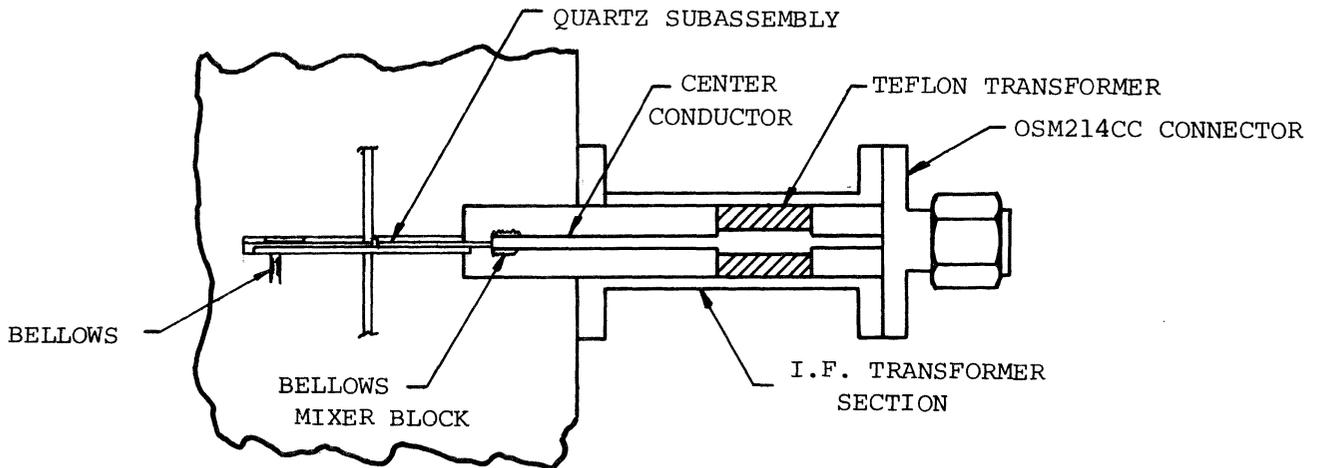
Sectional View of I.F. Transformer Section In Contact with Diode-Choke Subassembly
